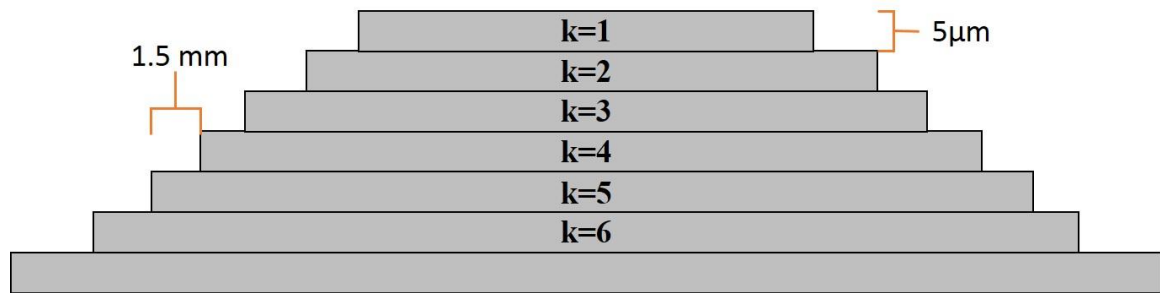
A schematic illustration of the stepped concentric workpiece after testing.
